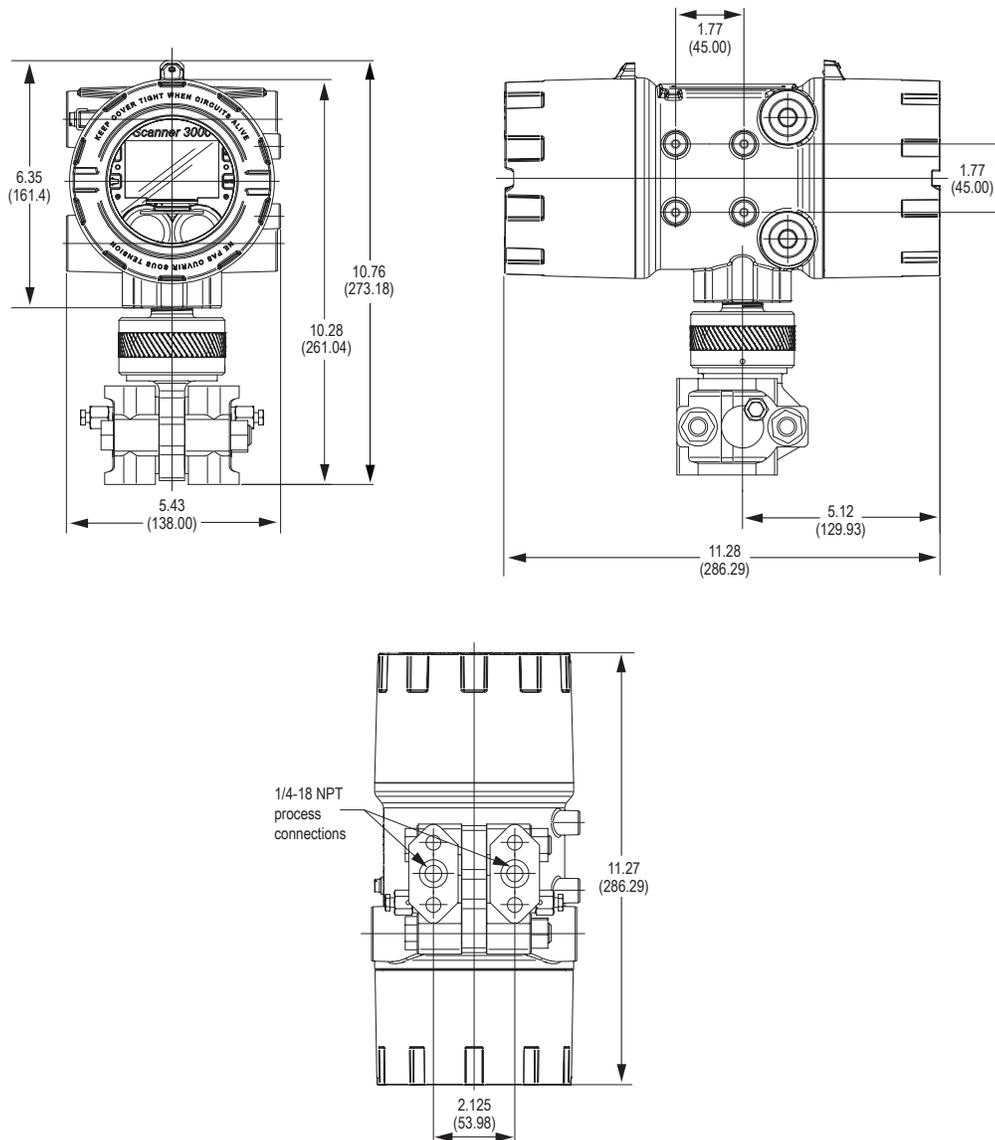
Scanner 3100 with MVT, direct-mount; dimensions shown in inches (mm)
